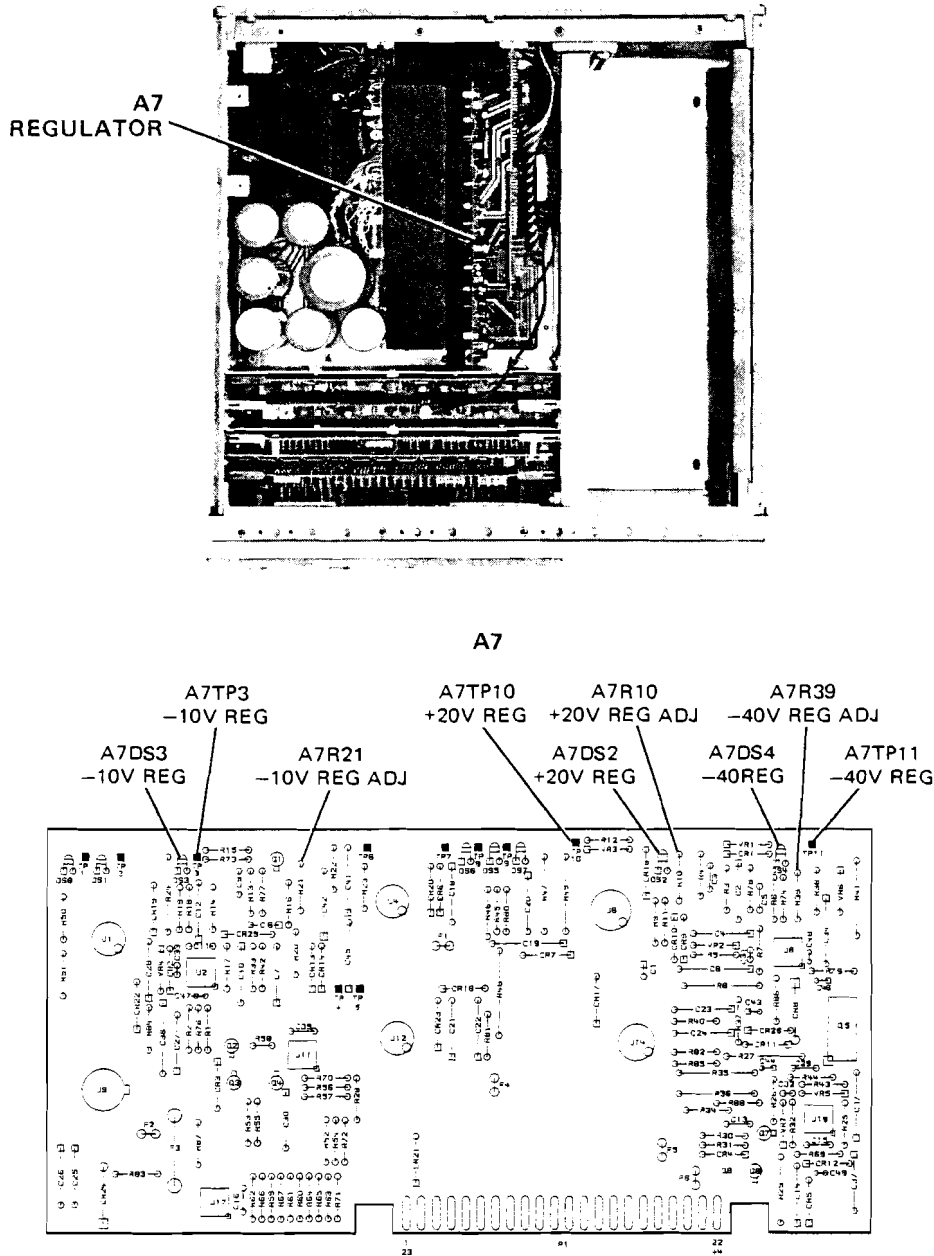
Location of +20V, -40V, and -10V Power Supply Adjustments.
